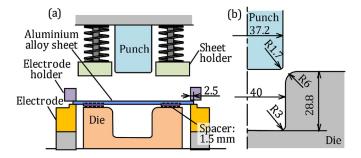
(a) Setup used for experiment of hot hat-shaped bending using resistance heating and (b) dimensions of tools.
